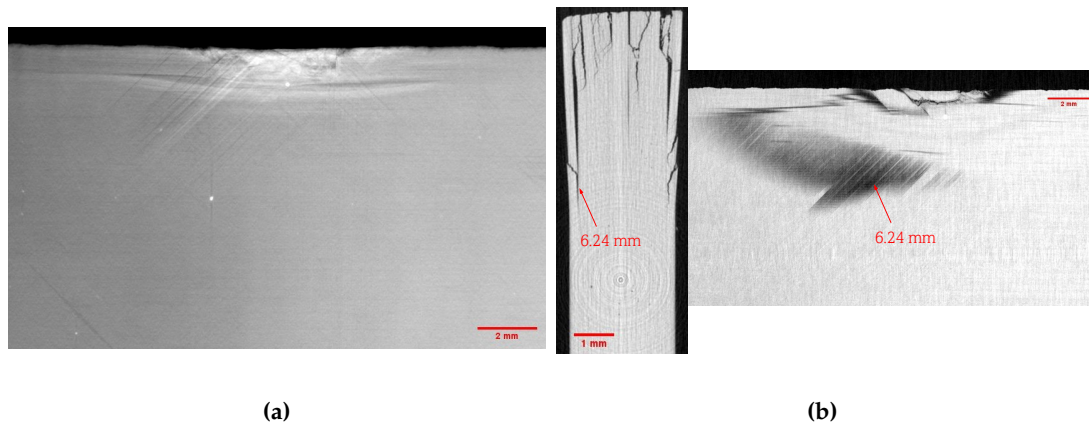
Damage extent from a 5 J energy edge impact in a specimen without binding. (a) Front view projection of the summation of all slices through the thickness of the specimen. (b) Deepest cracks side view and front view at the deepest crack slice (6.24 mm). The dark lines in 45° represent the delamination at interface 1.
